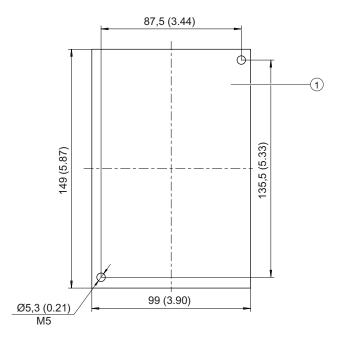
Dimension drawing of the DRIVE-CLiQ Hub Module External DME20, all data in mm and (inches)
